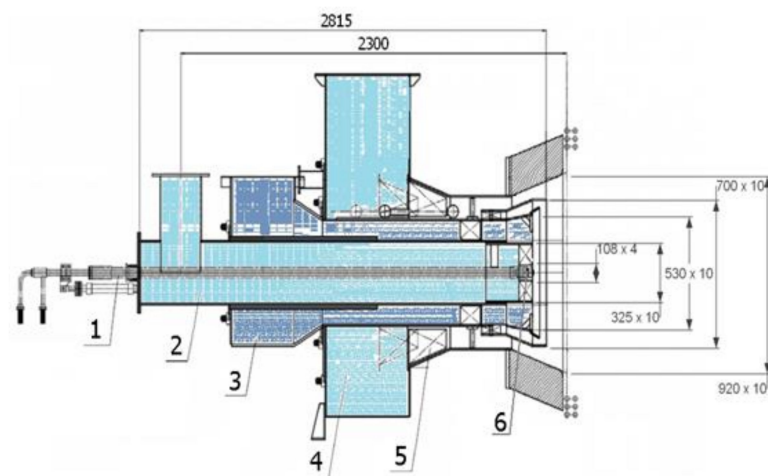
Diagram of the pulverized coal burner of the BKZ-75 boiler in longitudinal section. 1—fuel oil pipeline, 2—air for burning fuel oil, 3—air mixture box, 4—secondary air box, 5—blade apparatus, 6—fuel oil nozzle.
